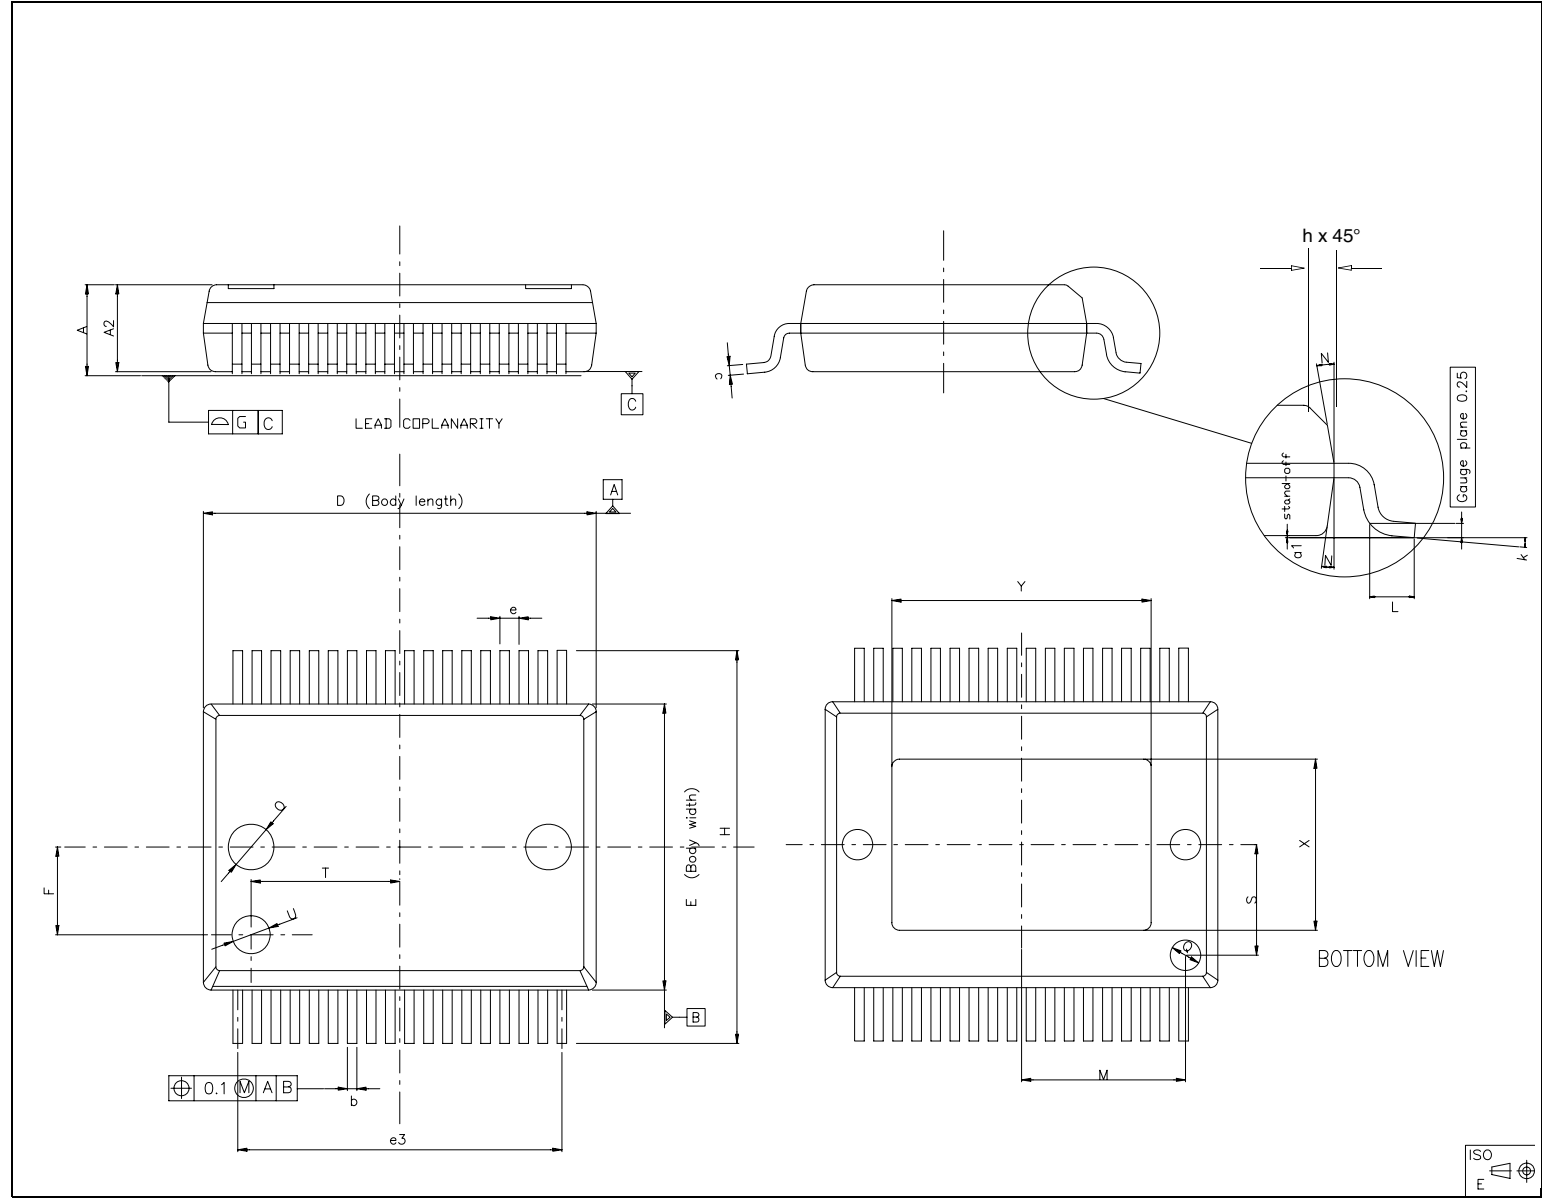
below shows the package outline and *Table 8* gives the dimensions.
